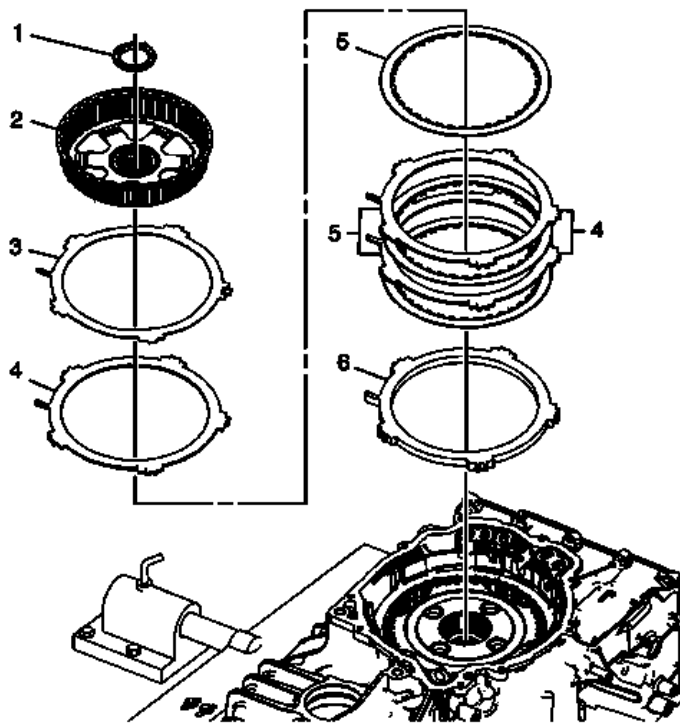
Identifying Reaction Carrier Hub & 2-6 Clutch Plate
